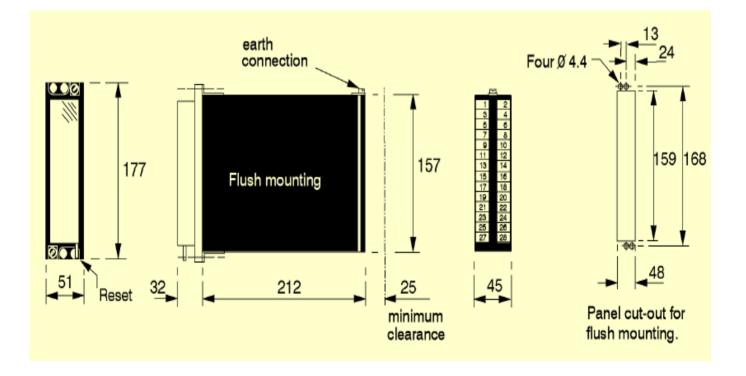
Dimensions of modular size 2 case (all dimensions are in mm)
